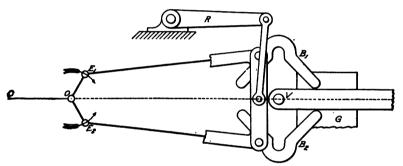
Reversing Device Using Two Eccentrics and Gab-Hooks
